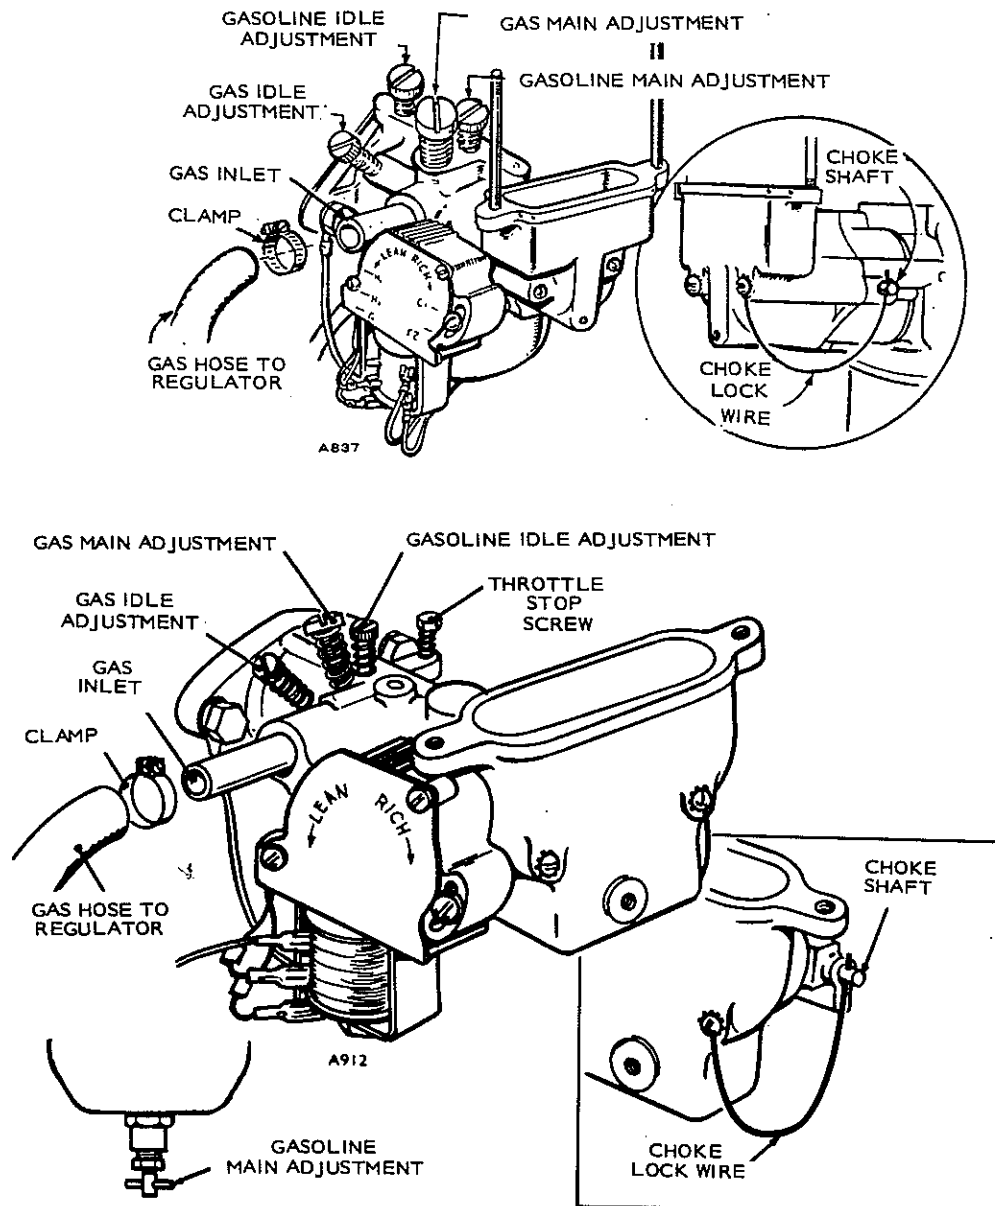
GAS/GASOLINE CARBURETOR AND ADJUSTMENT
